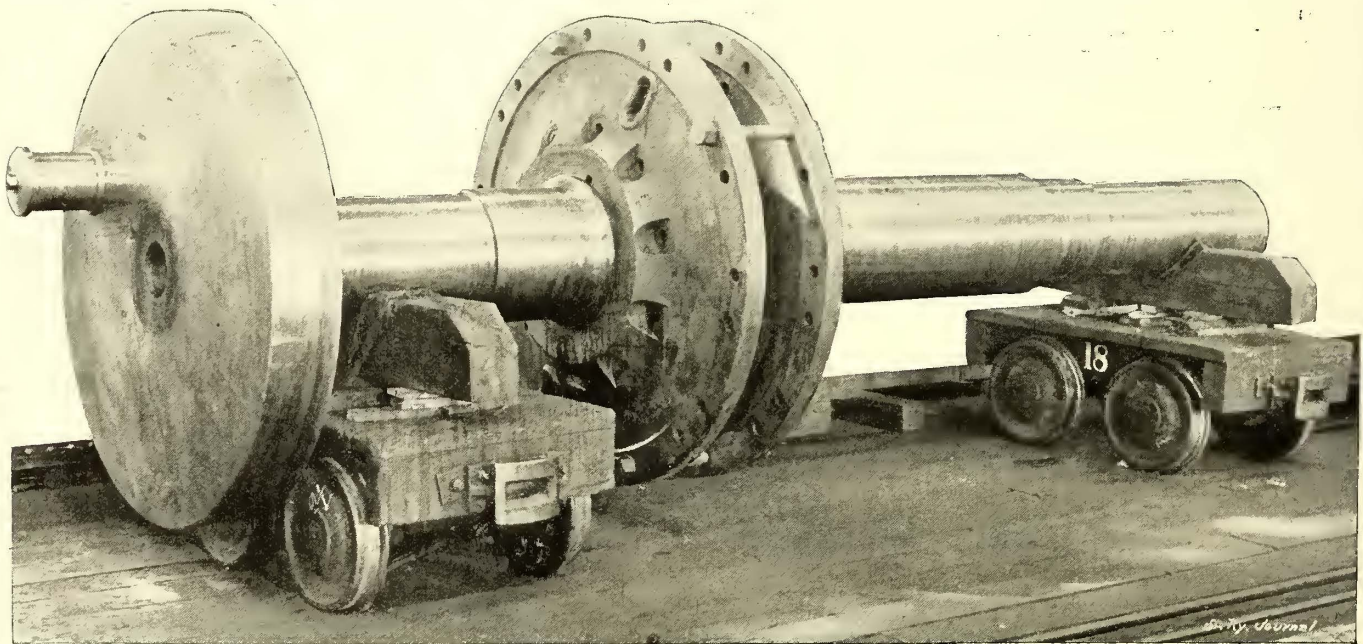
TEMPERED STEEL HOLLOW SHAFT FOR ENGINE OPERATING RAILWAY GENERATORS
